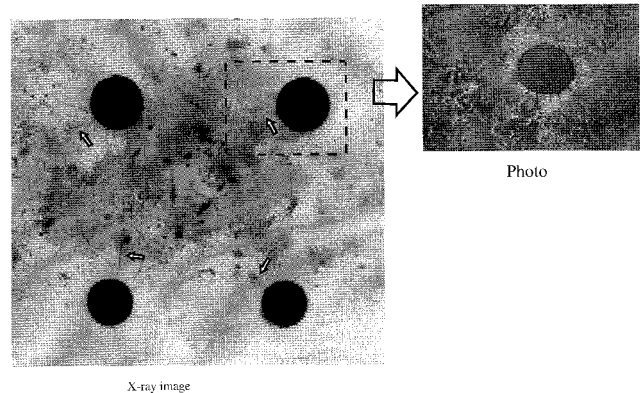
Image of disassembled fuselage lap joint obtained from retired aircraft showing cracks around rivet holes in the area with corrosion pillowing. All cracks present have not penetrated through the thickness.
